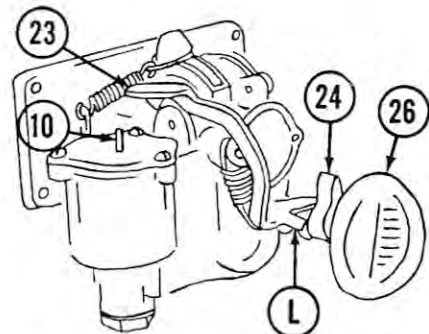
Carburetor is primed for starting by turning knob (26) counter-clockwise until primer cam (24) contacts tab (L) on primer lever (23). Lever depresses inlet needle (10) to flood carburetor.
